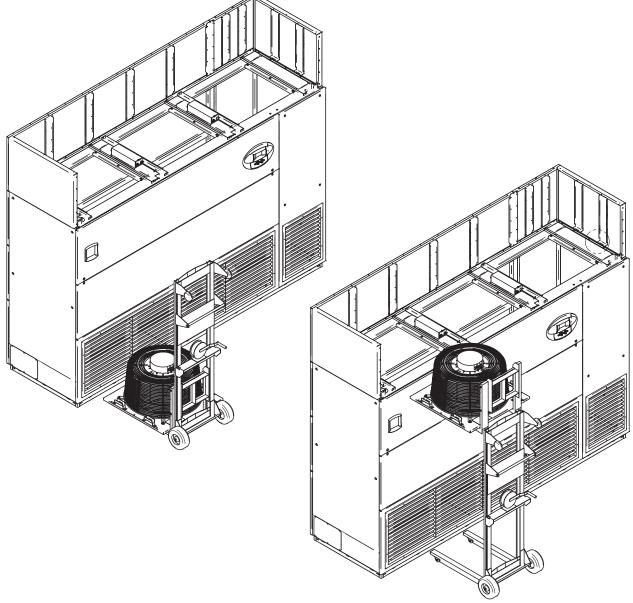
EC fan assembly alignment for placement on top of Liebert CW unit
